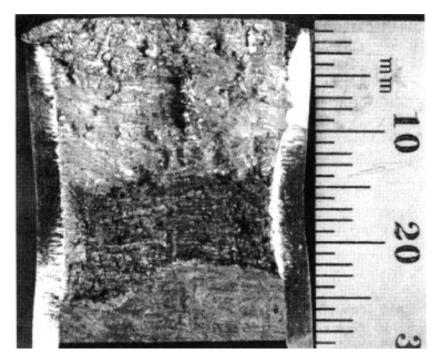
Fracture surface of aged weld metal PWCE tested at 25°C
